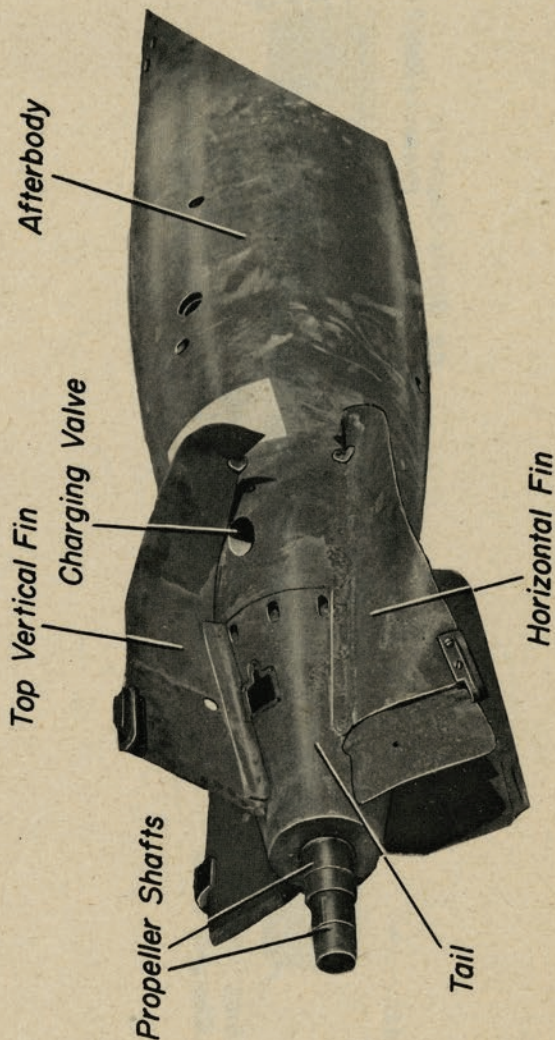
Torpedo Type 92-1, Tail Section, Starboard View
